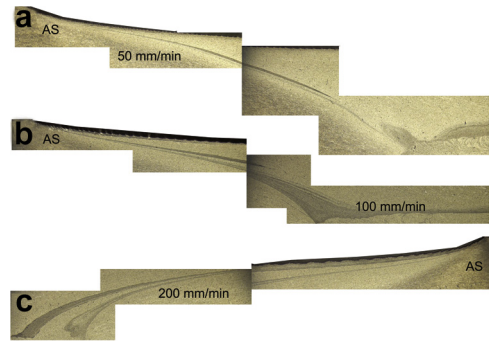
Structure of band pattern at different welding speeds: (a) 50 mm/min, (b) 100 mm/min, (c) 200 mm/min.
